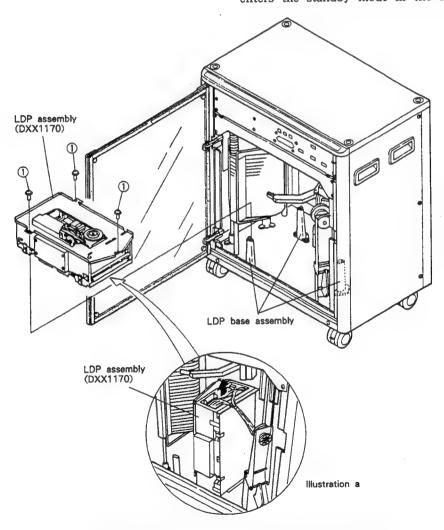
Replacement of the LDP assembly (DXX1170)
